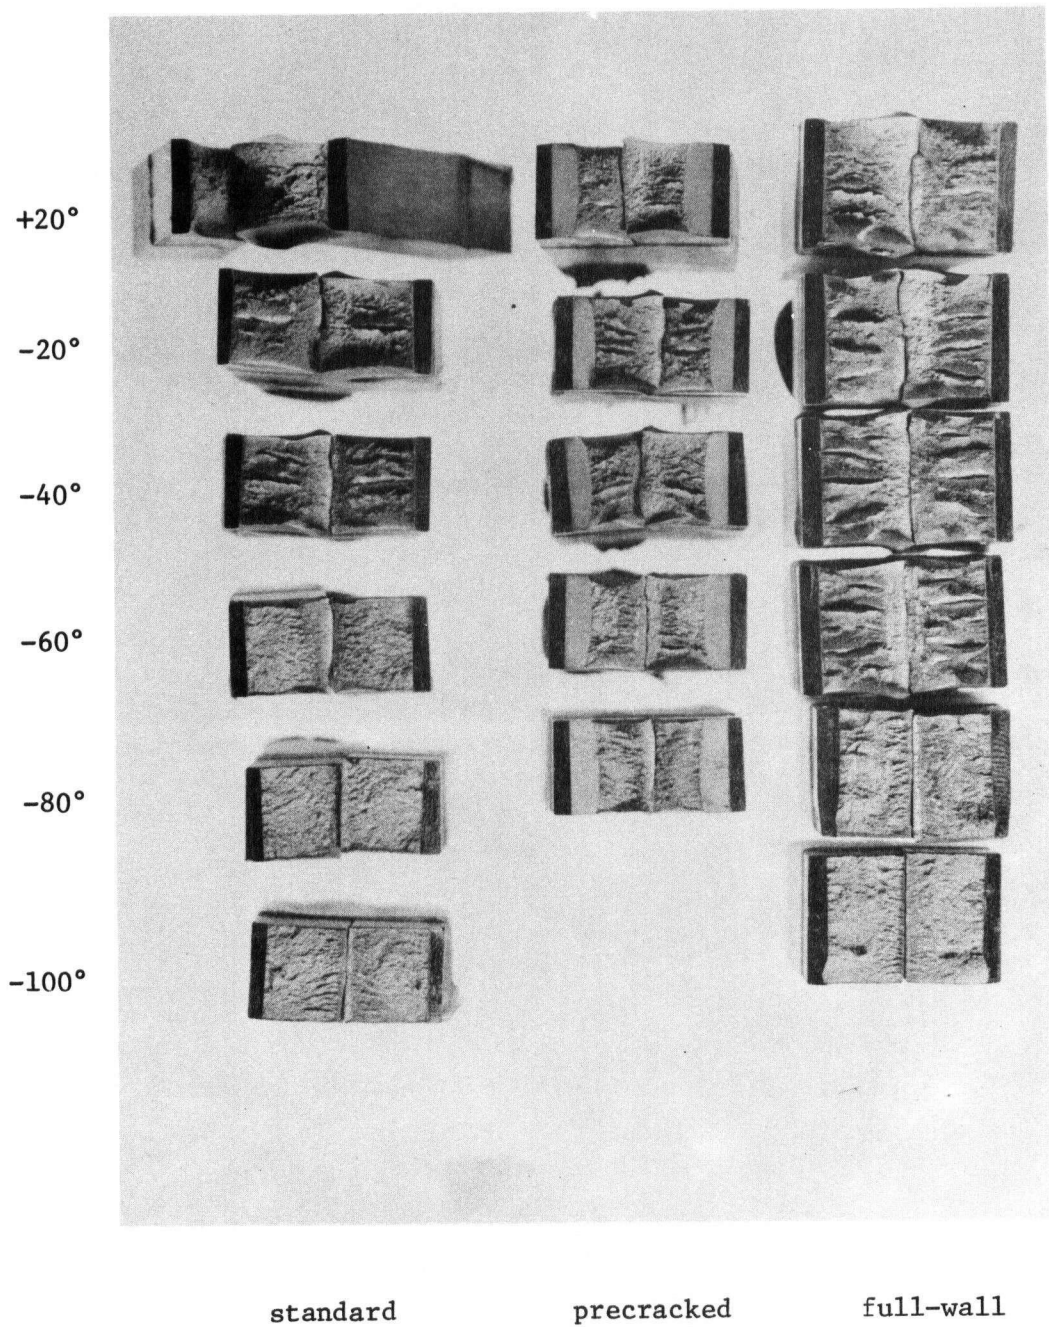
AF-1 steel fracture surfaces, crack parallel to pipe axis.
